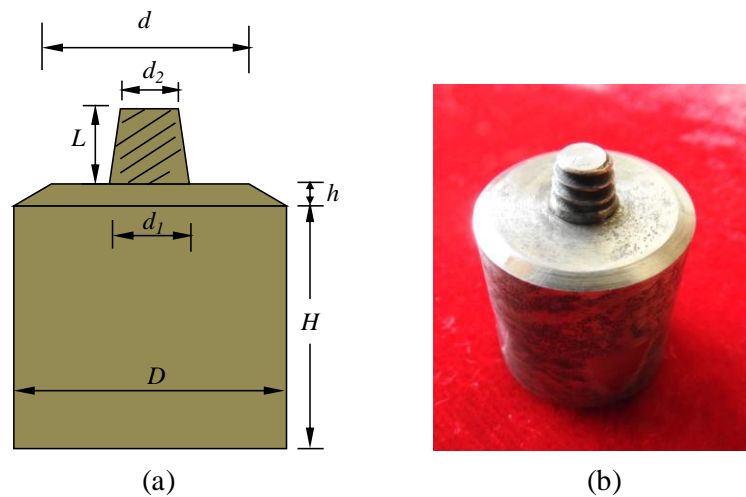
(a) Schematic of taper threaded cylindrical showing the tool dimension and (b) photograph of tool.
